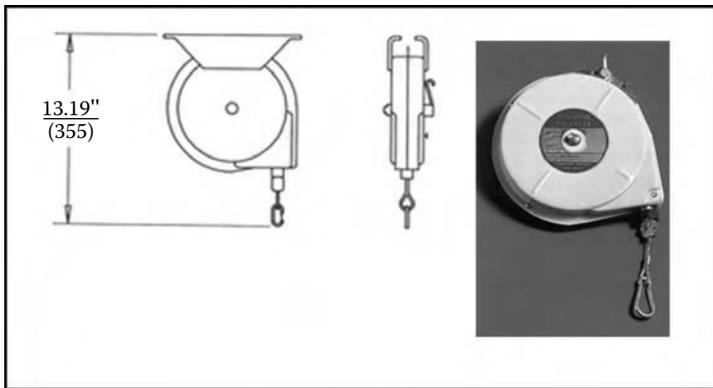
Tool retractor, courtesy of LK Goodwin Company, material handling equipment, Providence, RI.
